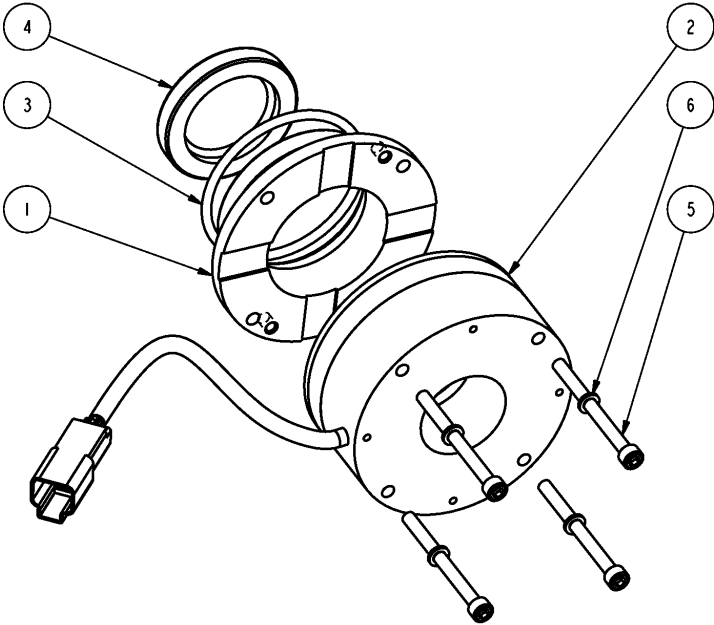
Shaft Brake W/Adapter (DGC2400)
